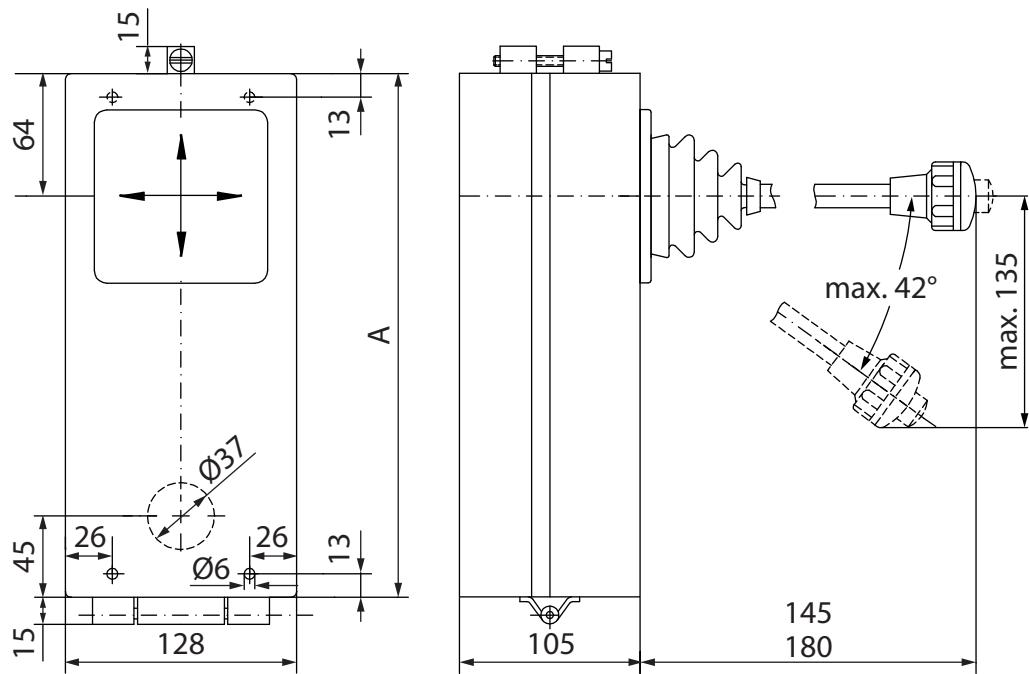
Joystick VNS0-LF-H (dimensions in mm)
